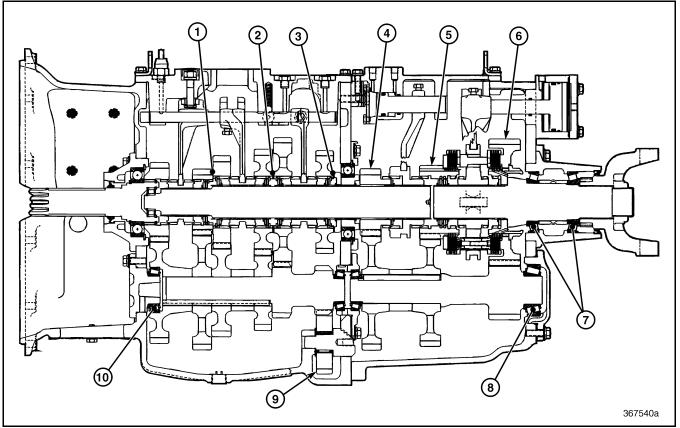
Gear End Play and Bearing Preload (T313L21/T318L21 Shown)
